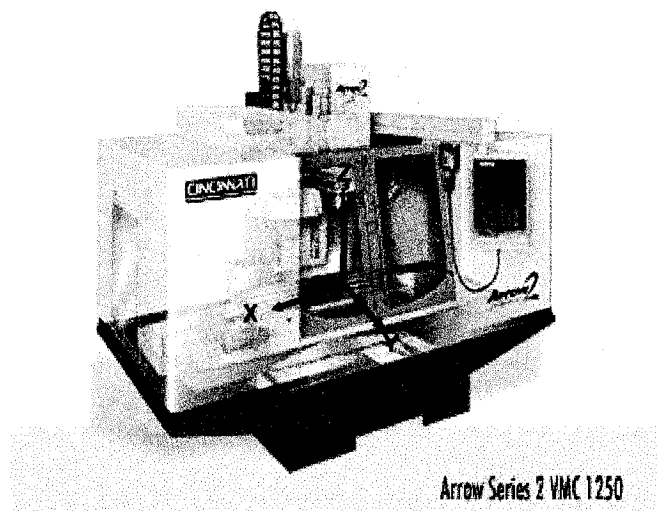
Diagram of a 3-axis CNC vertical milling machine.
